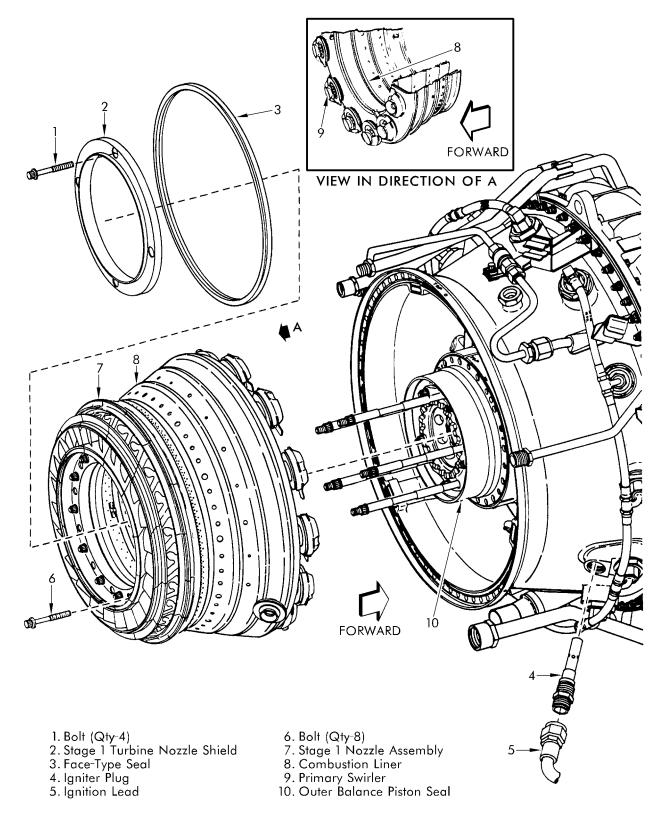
(T701, T701C, T701D) Stage 1 Nozzle Assembly, Face-Type Seal, and Combustion Liner; Removal
